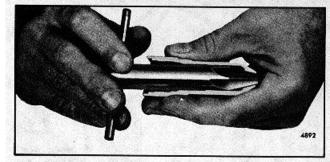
Cleaning Injector Nut Spray Tip Seat with Tool J 9418-5
